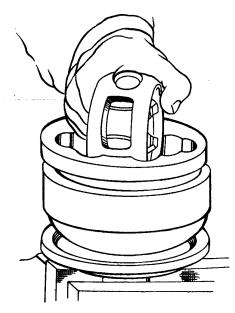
Removing Cage Complete with Holder from Joint Housing
